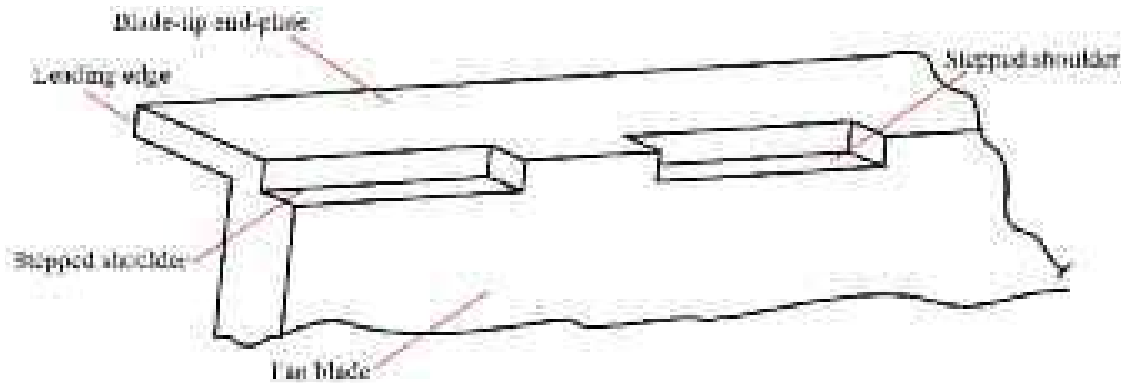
A further embodiment of the blade-tip end-plate incorporating series of cutaway stepped shoulders.
